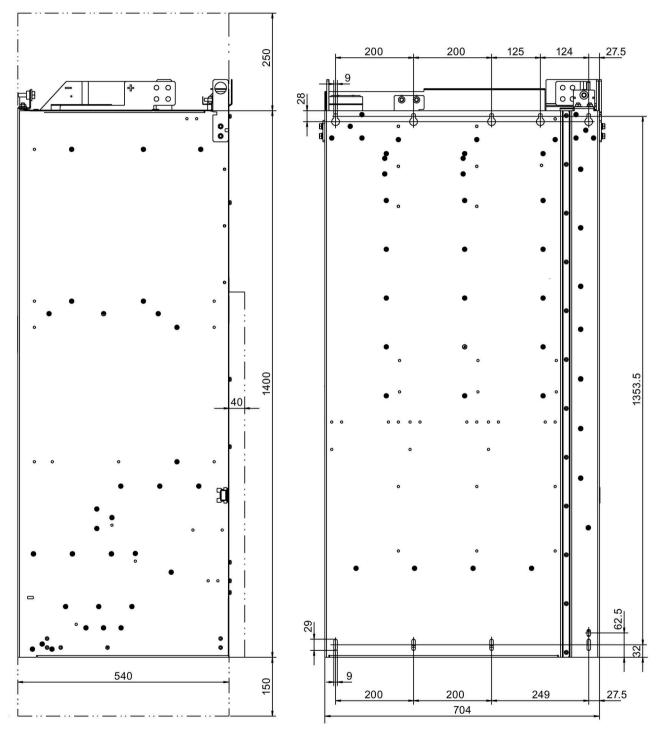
Dimension drawing Motor Module, frame size JX Side view, rear view
